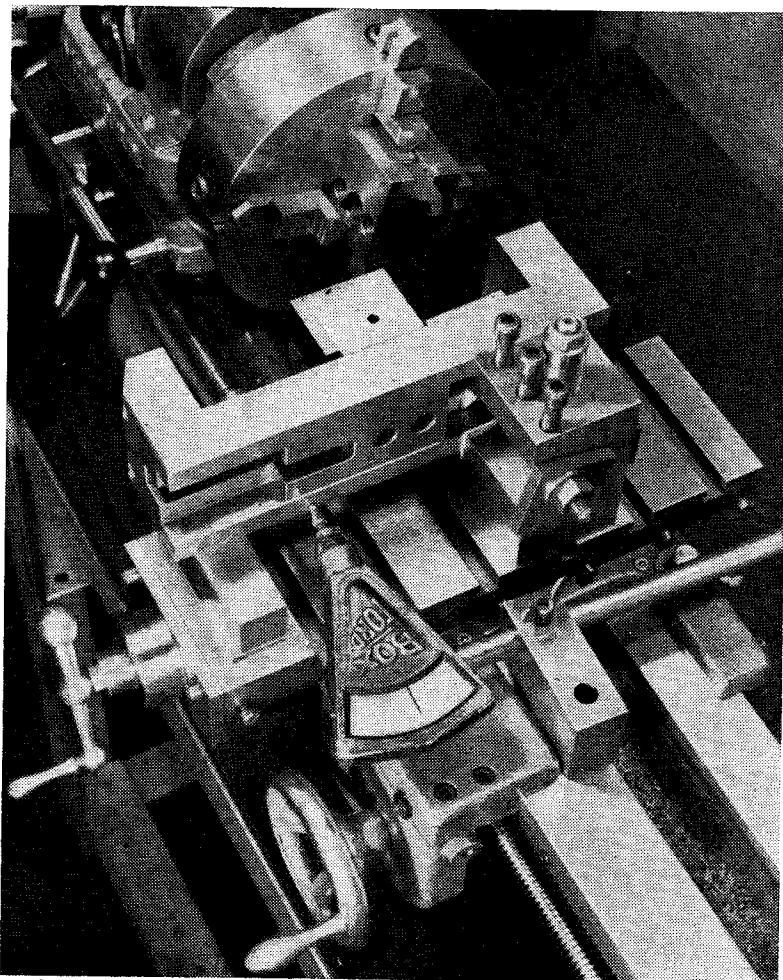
Set-up for facing the upper surfaces of a machine vice. The "block" in the chuck was not made especially to hold the facing tool
